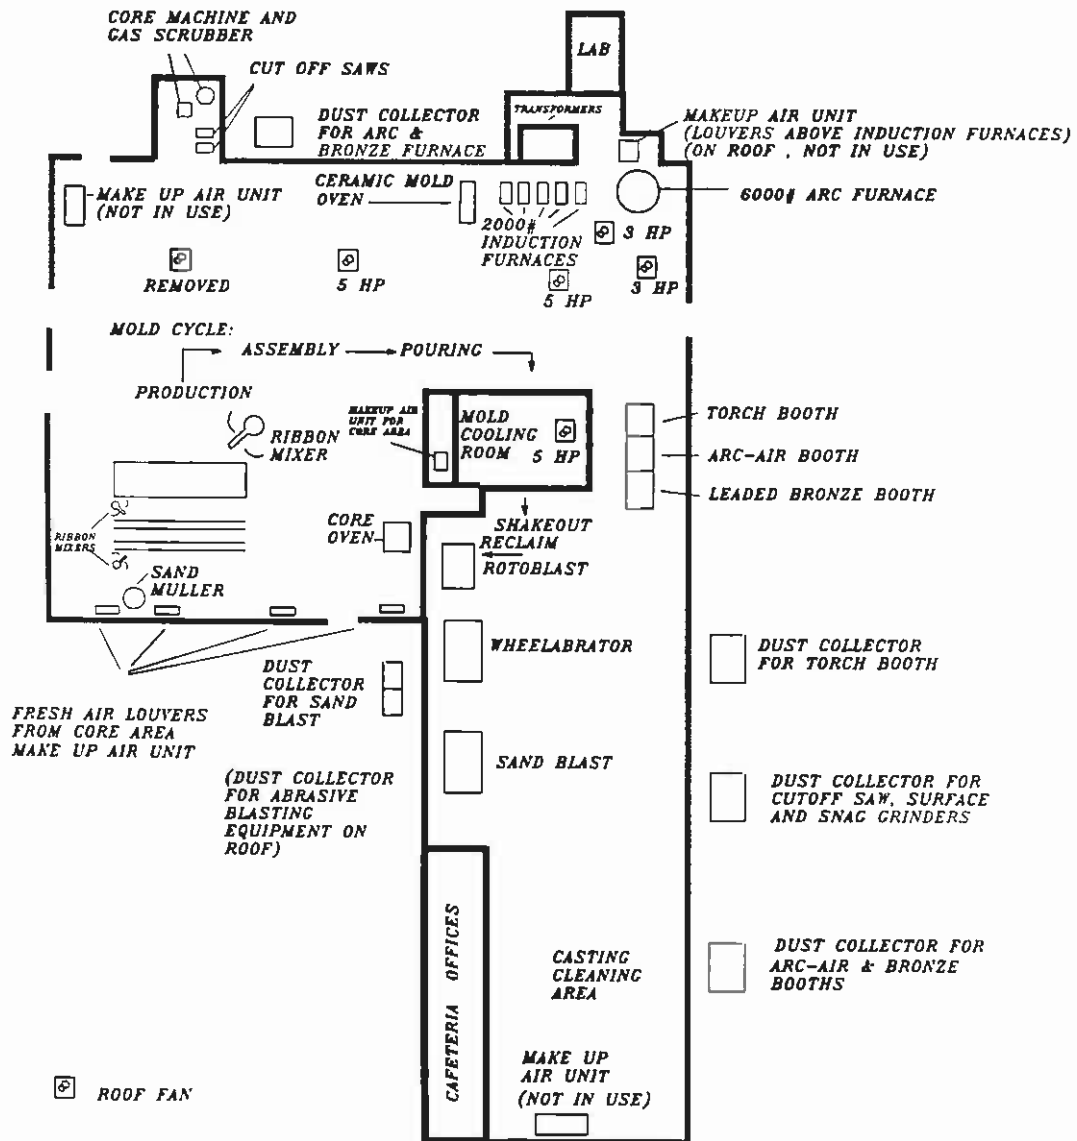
Schematic layout - Ingersoll-Rand steel foundry.
